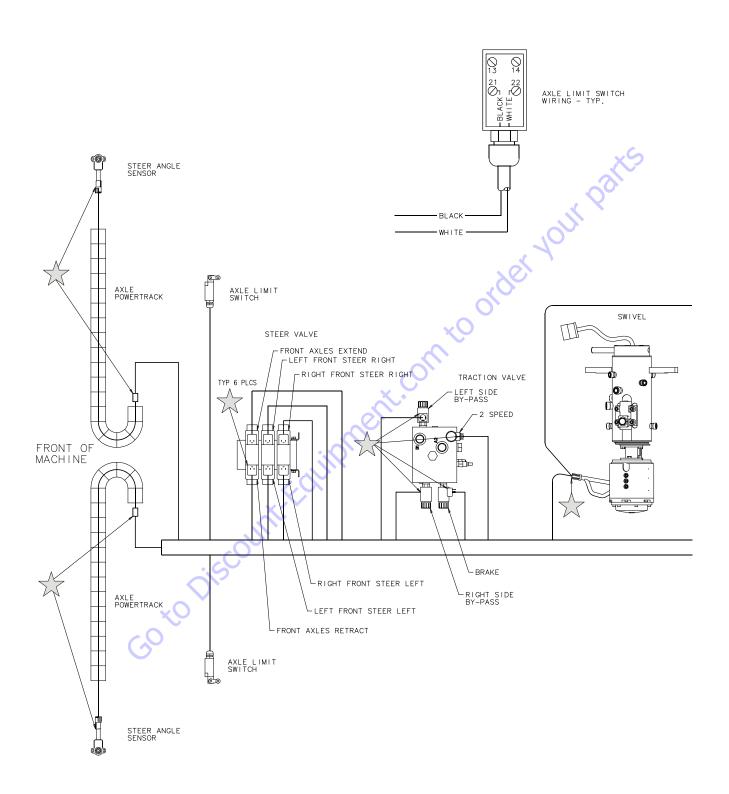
Chassis Electrical Components - Sheet 1 of 2
